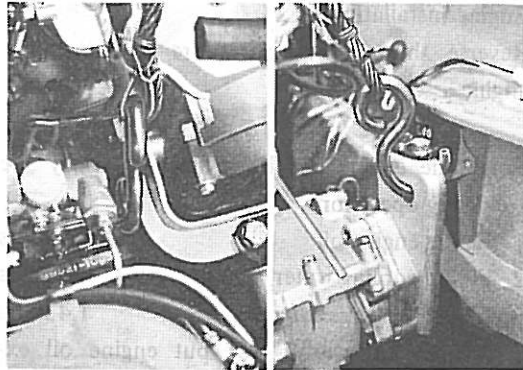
Attaching Location of Engine Hanger Hooks
